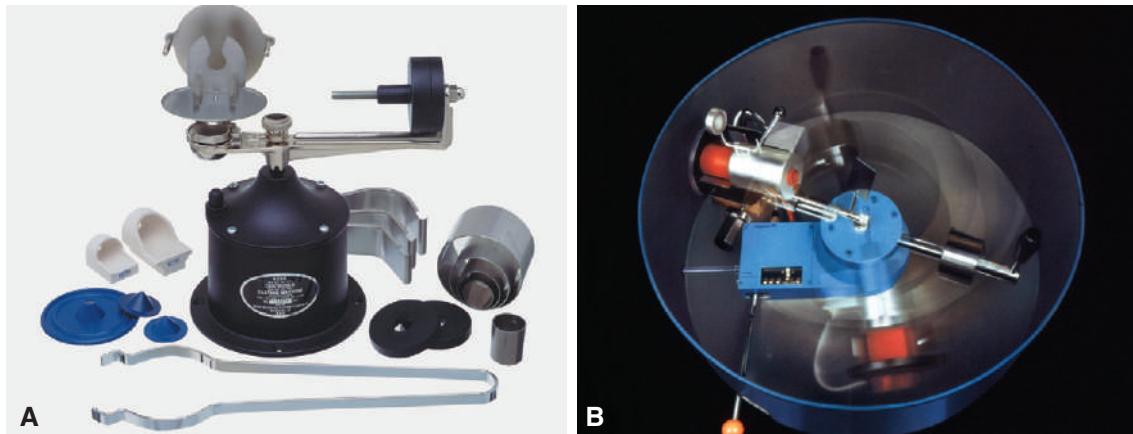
Casting machines. (A) Kerr Broken-Arm. (B) Degussa Model TS-1. (A, Courtesy Kerr Corporation, Orange, California. B, Courtesy Dentsply Sirona, York, Pennsylvania.)
